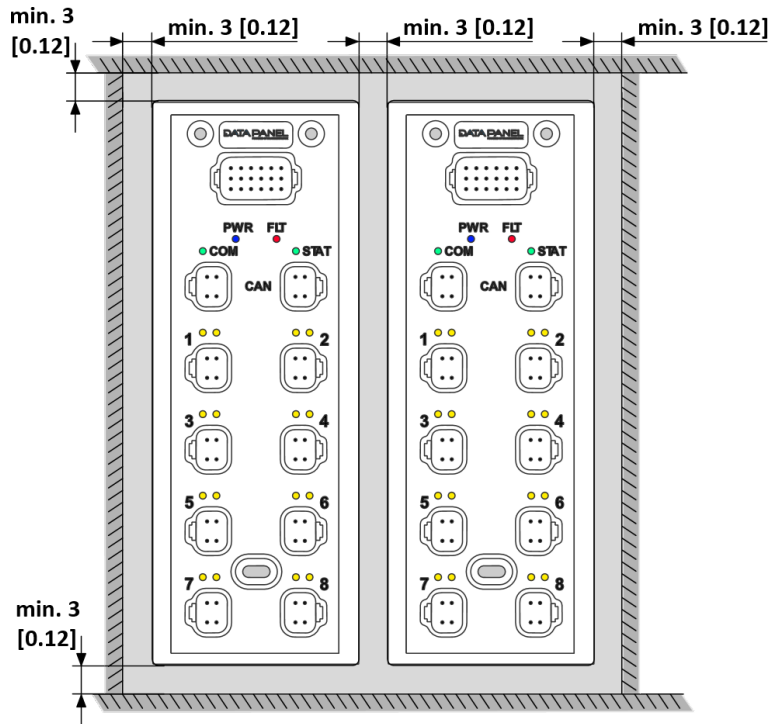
Mounting distances min. 3 mm (0.12 in)
